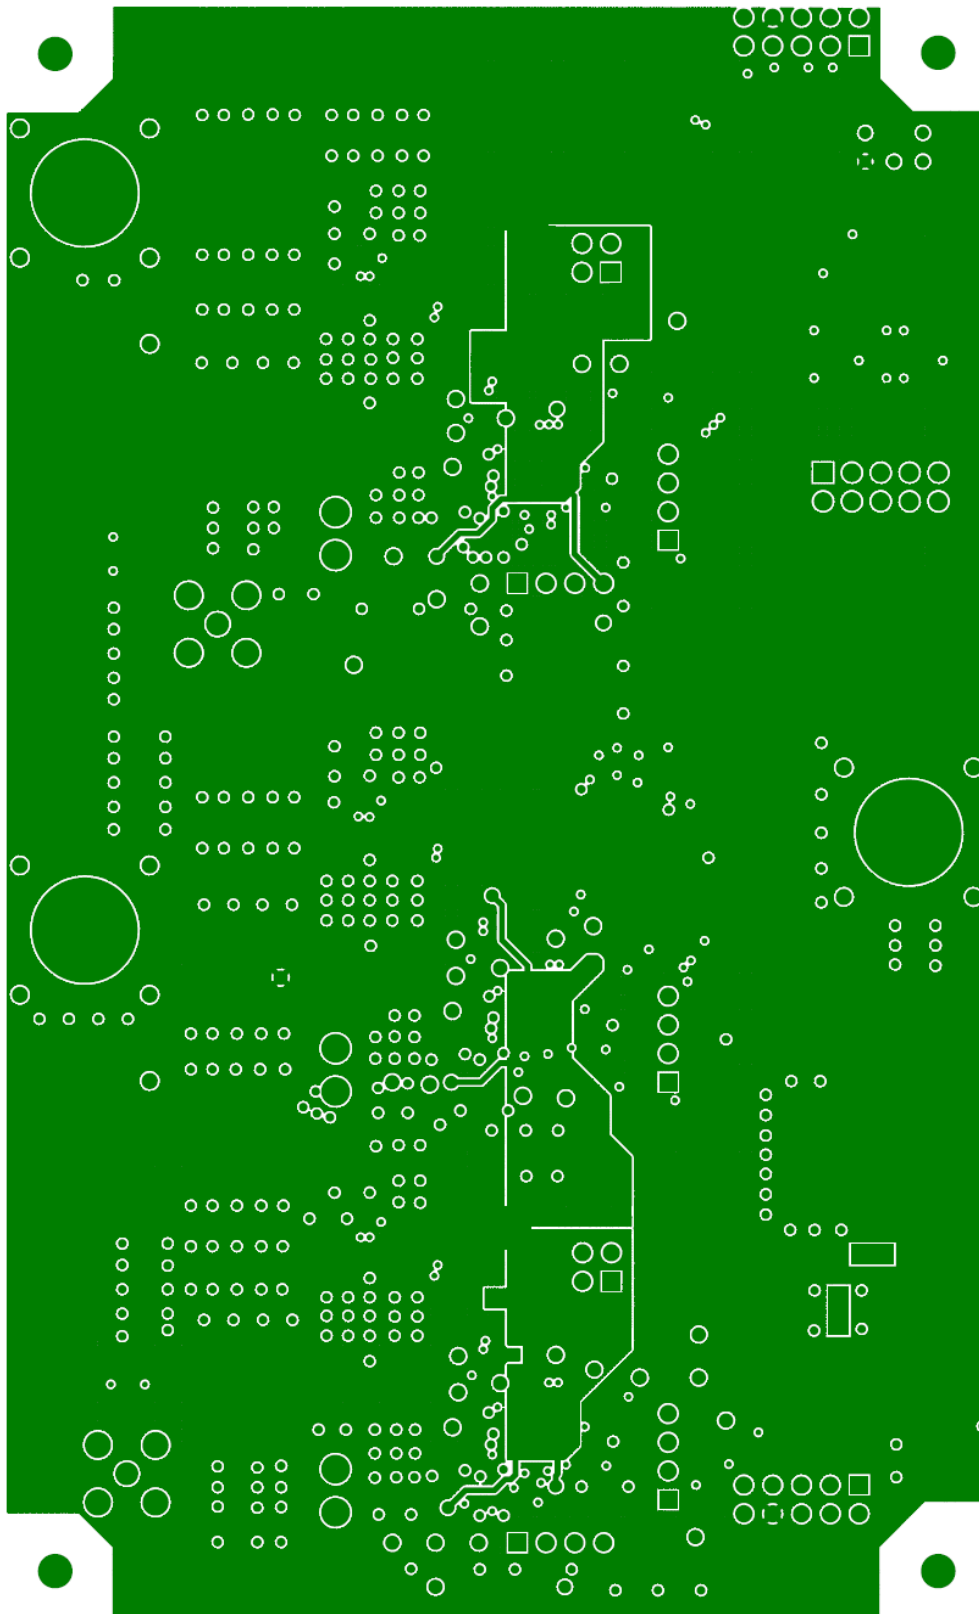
PCB – INNER LAYER 1 (VIEWED FROM TOP)
